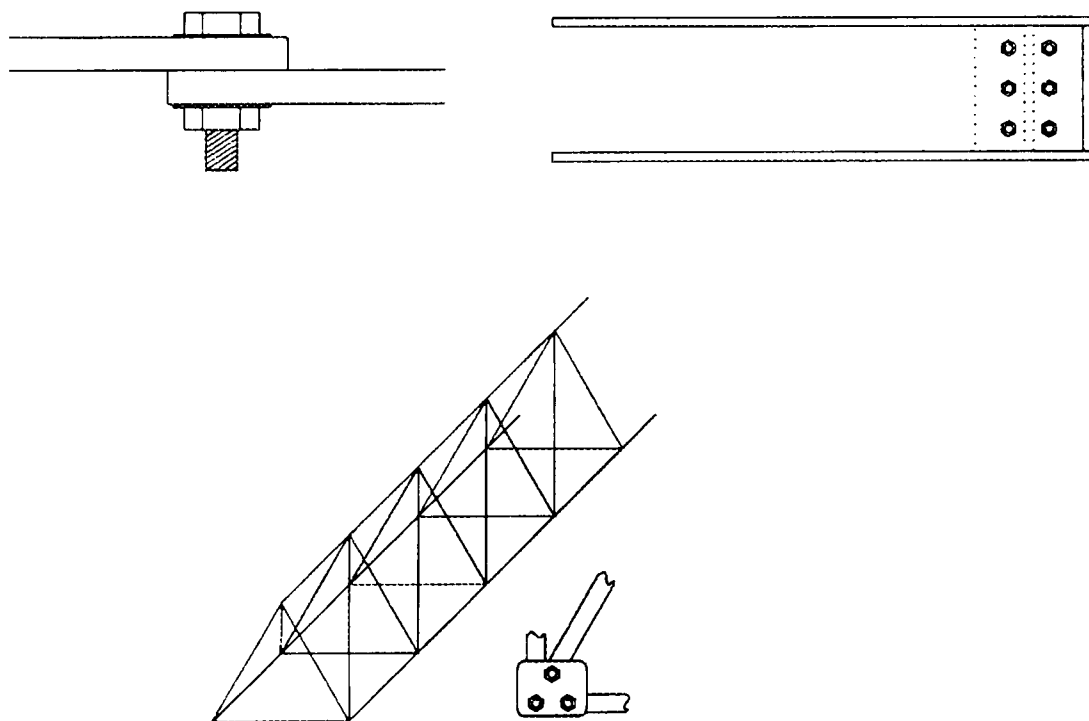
Bolted joints used to connect components in: A simple lap joint, a multiple bolt configuration and a 3-Dimensional truss structure.
